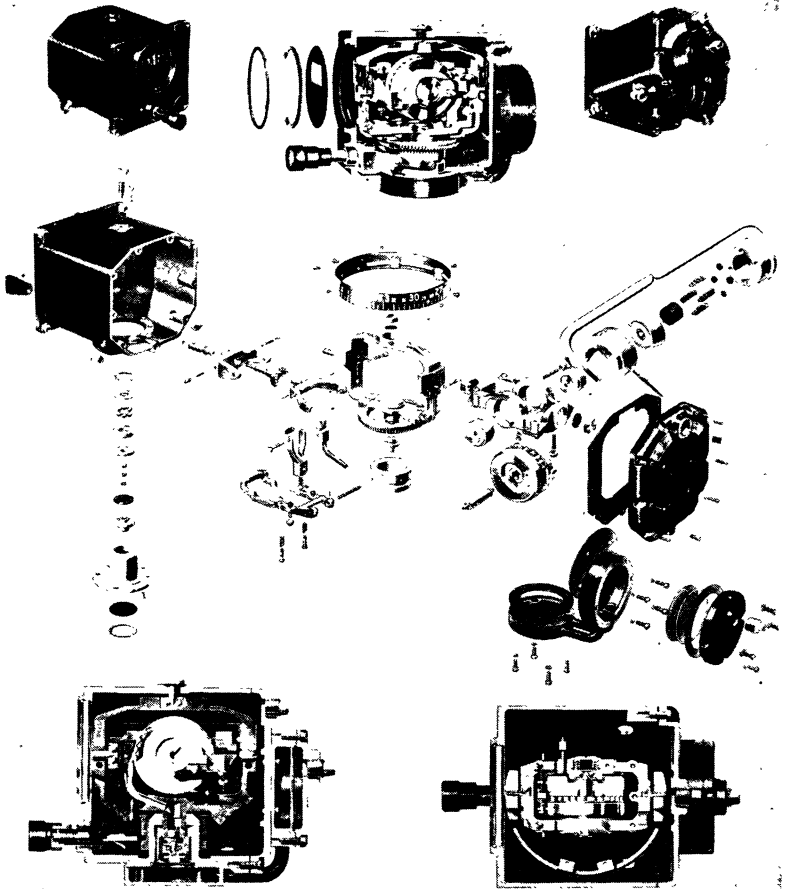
“Exploded” view of an aeronautical instrument. (Courtesy of Ternstedt Manufacturing Division, General Motors Corporation.)
